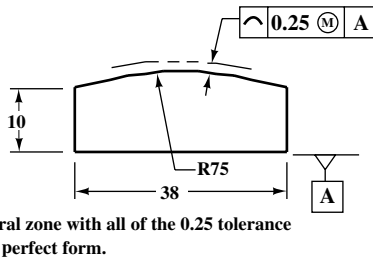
Application of a unilateral geometric tolerance zone outside perfect form
